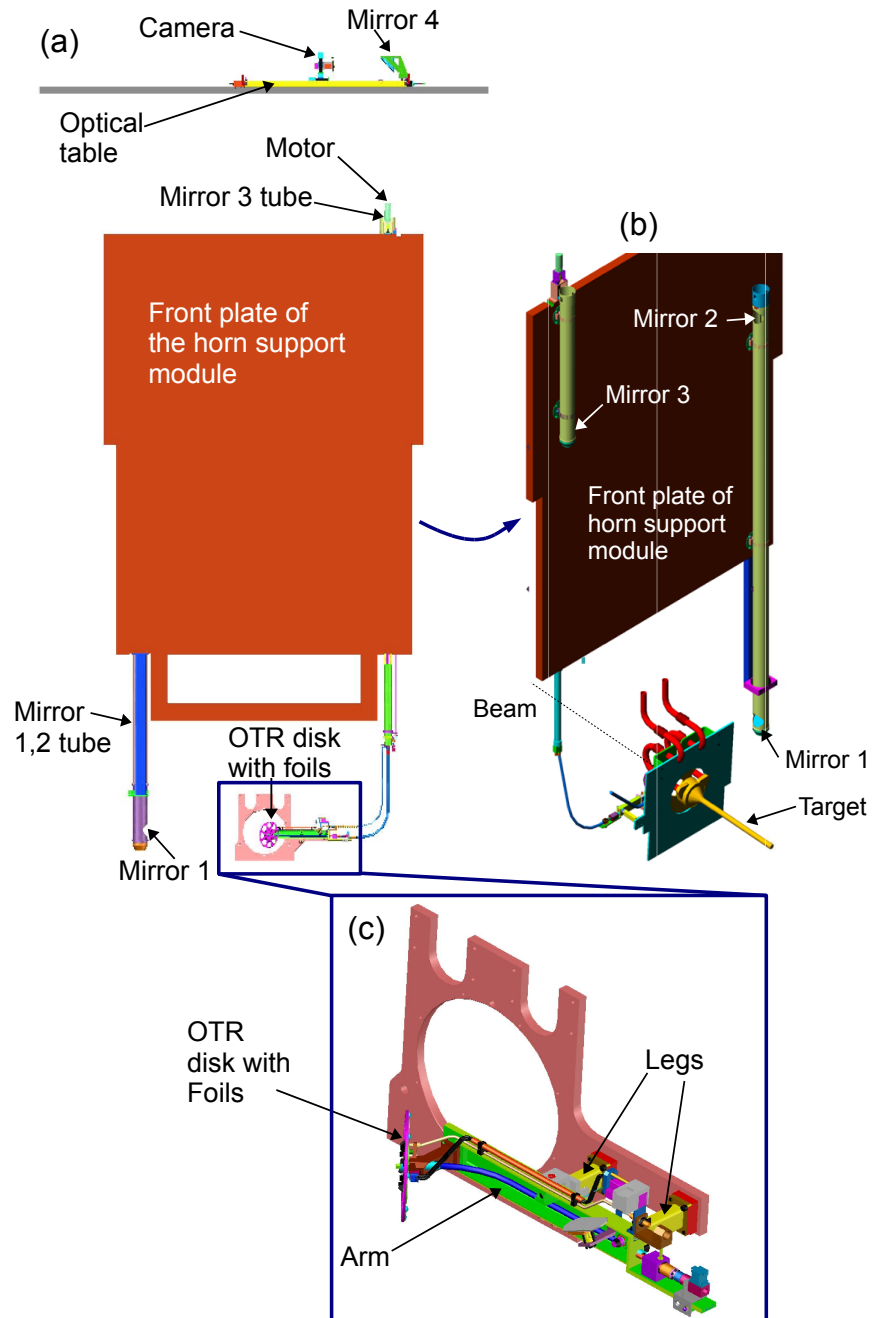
CAD drawings of the OTR system in various perspectives. (a) A view of the horn support module and surrounding area with the beam going into the page. The target-horn assembly below the module, which the monitor components at the bottom of the figure are attached to, is not shown for clarity. (b) The rear view of the horn module showing the mirror tubes and part of the target-horn assembly. (c) A zoomed-in view of the monitor components near the beam.
